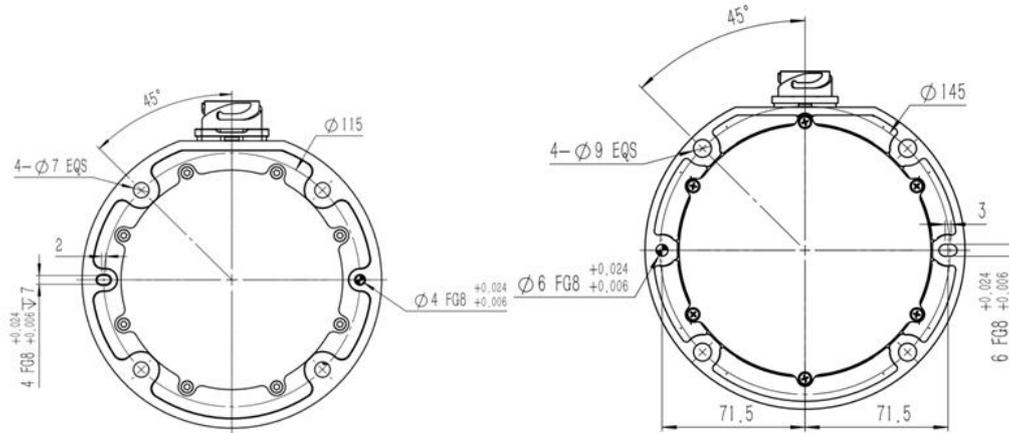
Mechanical mounting interface for the - S3-60 and S5-90 pedestals
